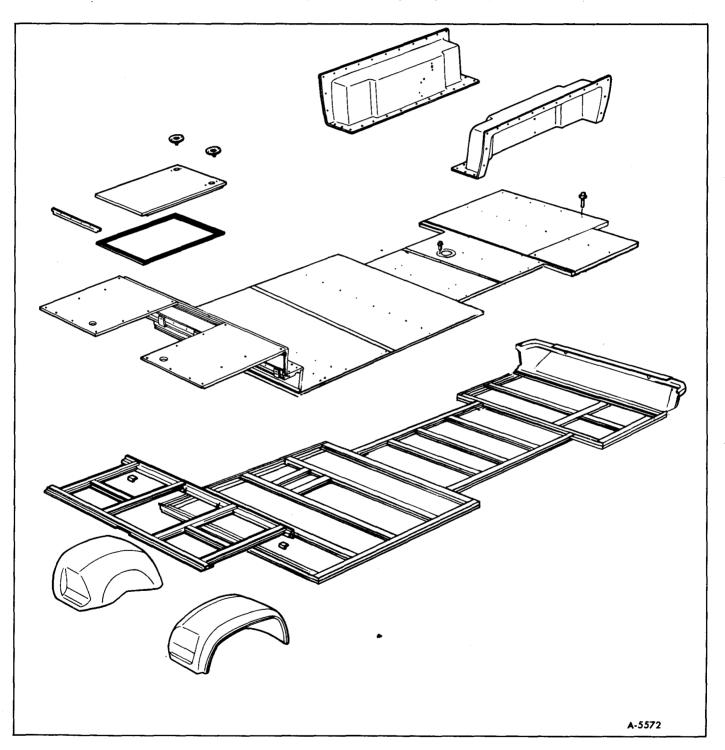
Wheel Housing, Floor and Floor Sub-Structure (Typical)
